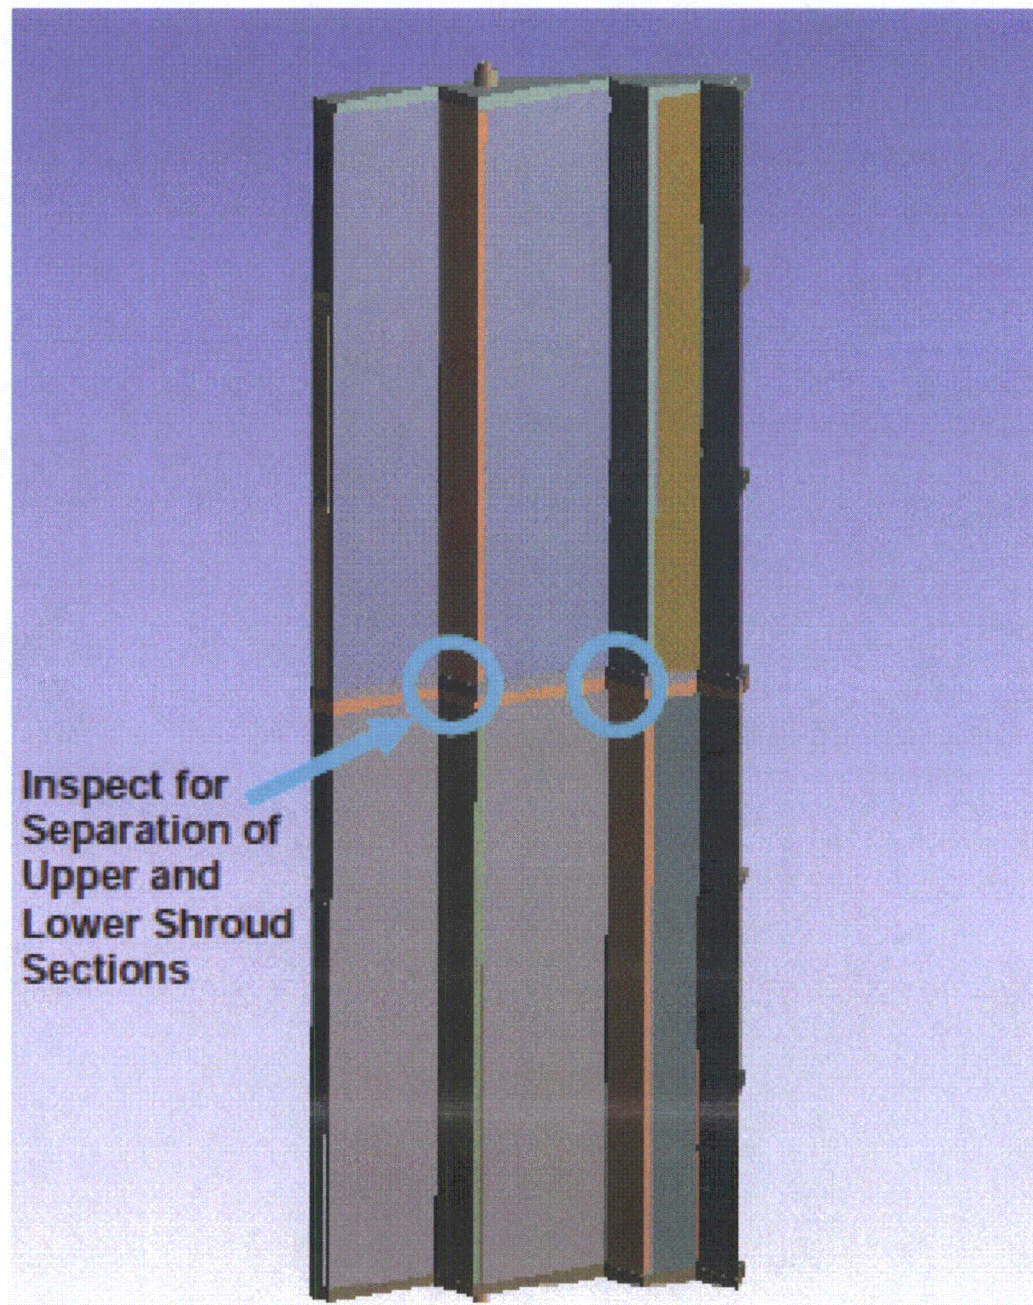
Typical Flange Plates in CE Welded Core Shroud
